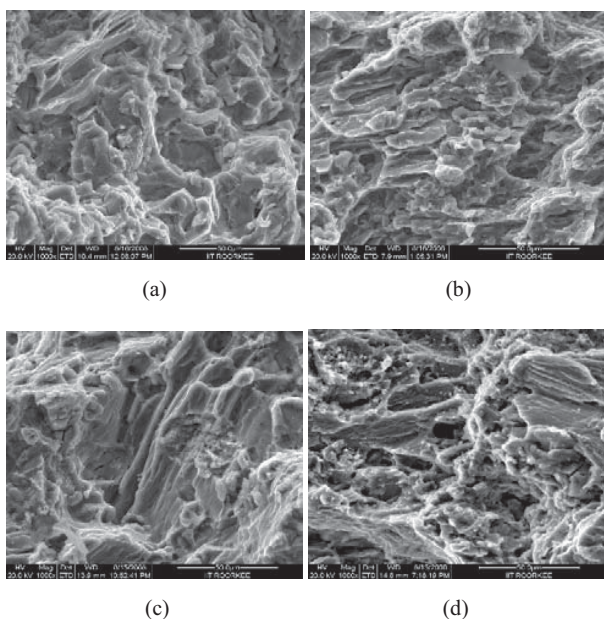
SEM fractographs showing tensile fracture surfaces of (a) cast MA6T, (b) forged MA6T, (c) cast MA12T and (d) forged MA12T
